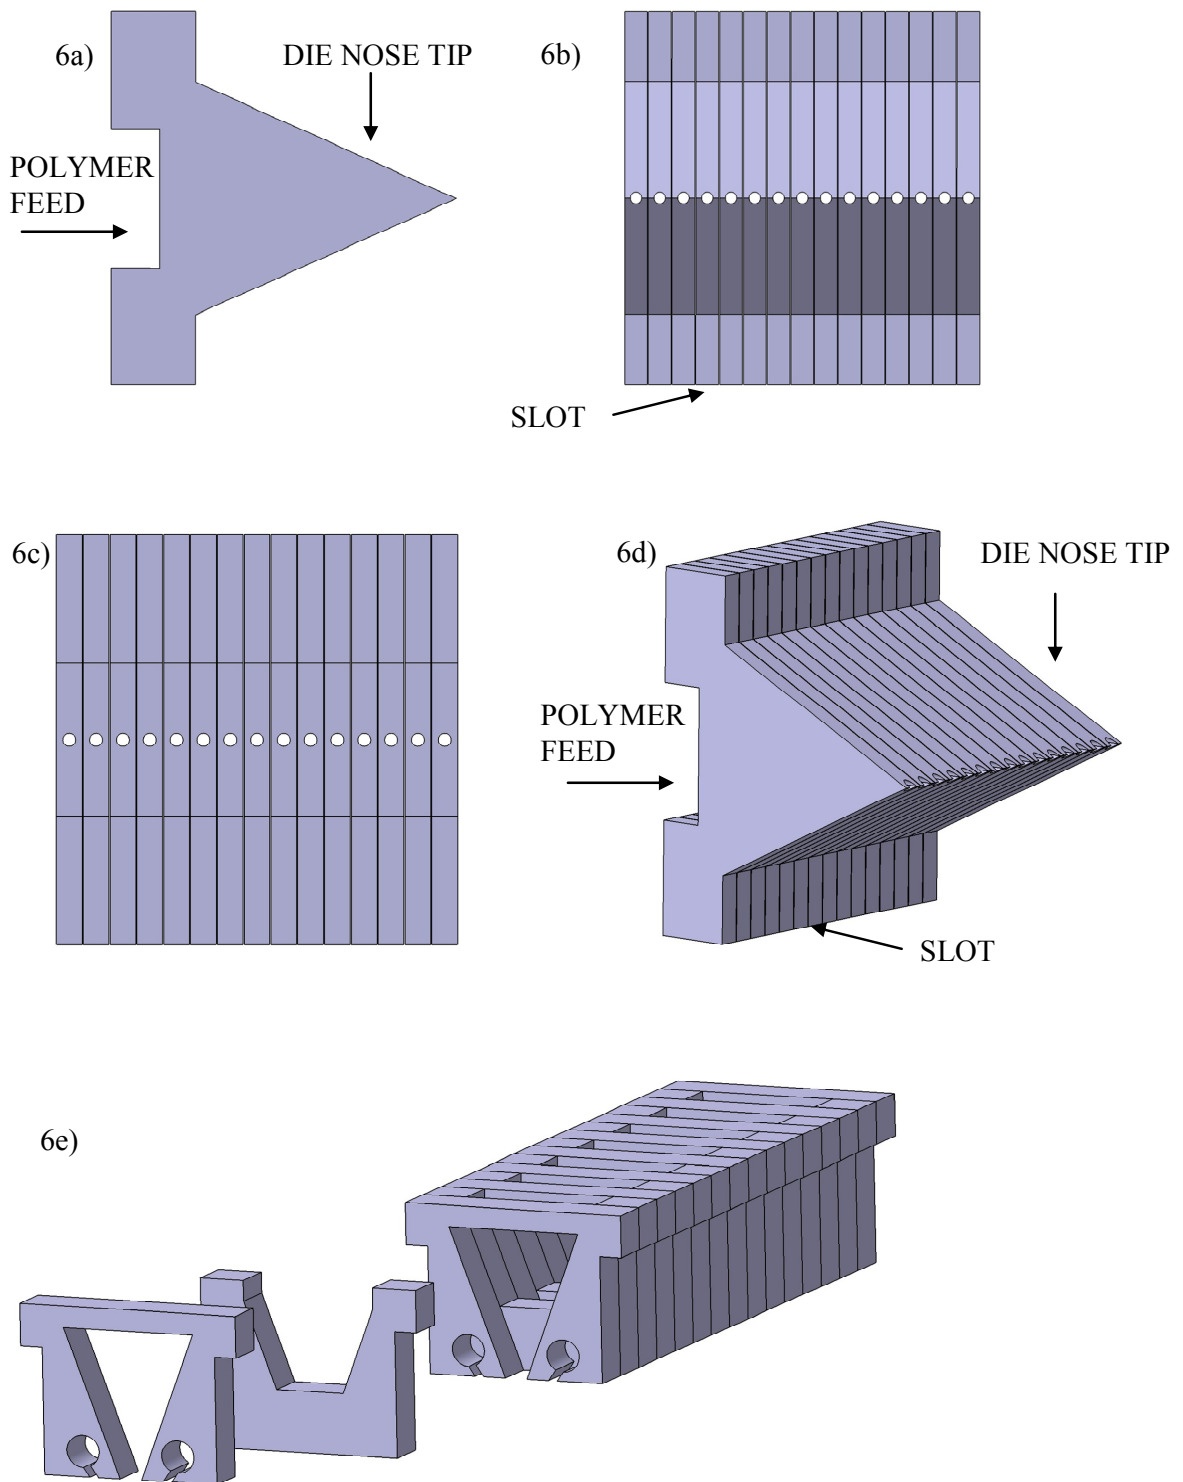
Die assembly capillary types [6,17]; 6a) Left view, 6b) Front view, 6c) Rear view, 6d) Isometric view, 6e) 3D assembly.
